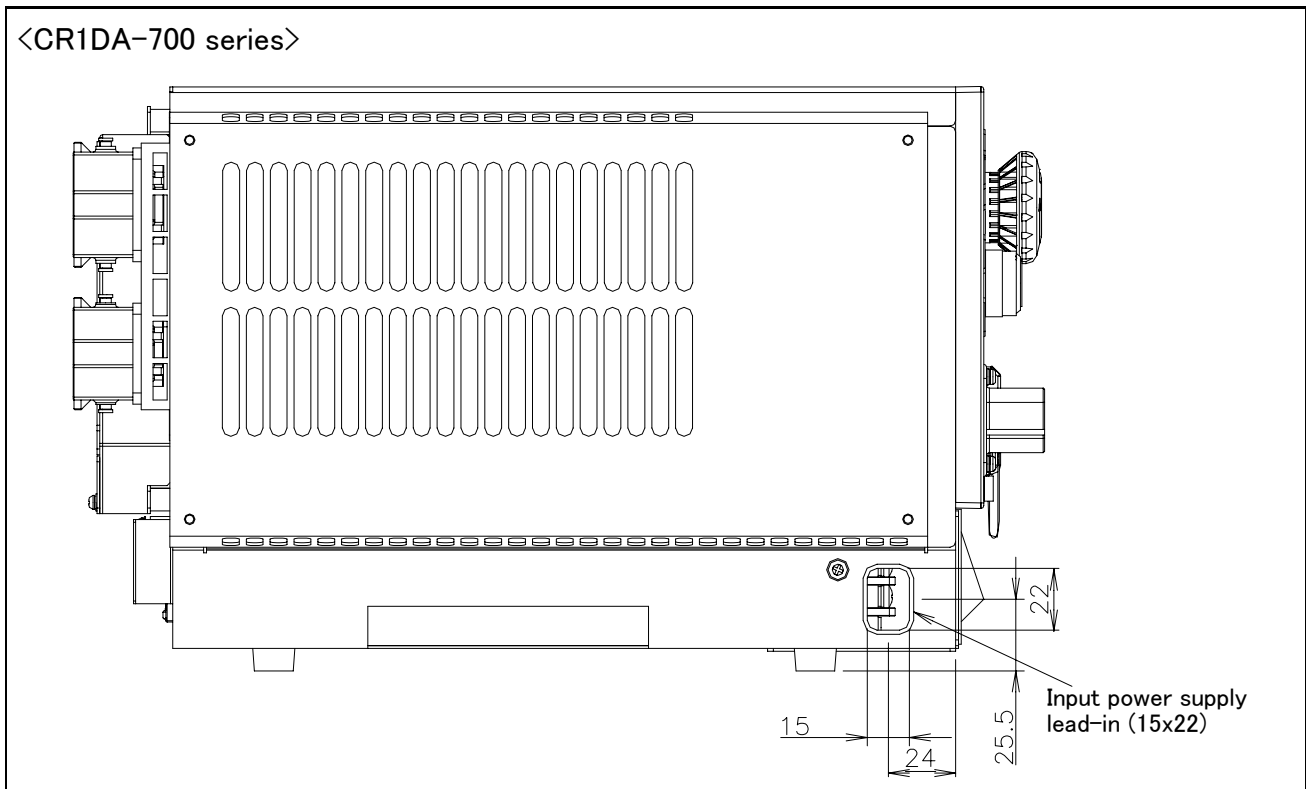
Cable lead-in and dimension of the controller (CR1DA-700 series)
